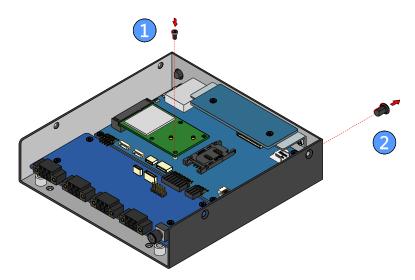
Securing MiniPCle module and removing 3G antenna hole cover
